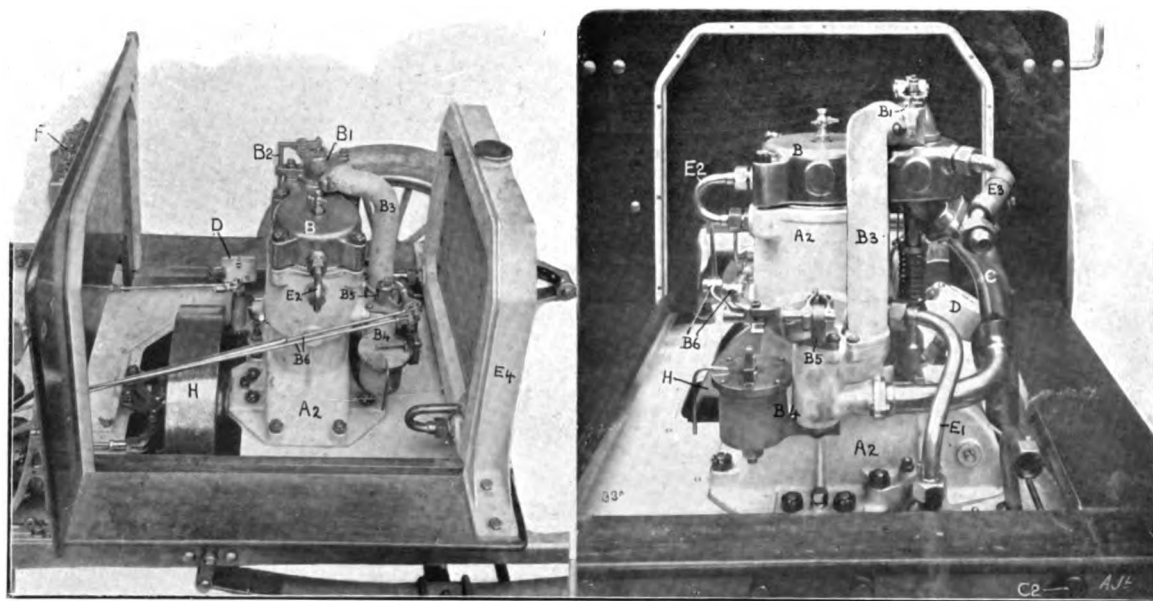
Front view of the 6-h.p. Siddeley Chassis, with the Radiator removed to show the Engine. In this view the Central Trunnion that supports the Engine and Gear Casing is prominent.
